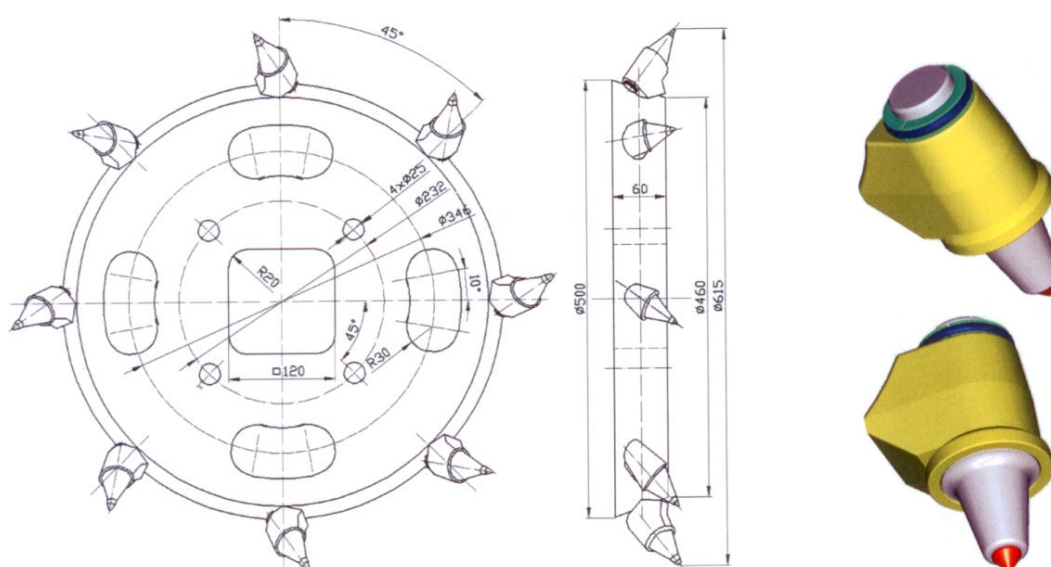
Final shape of excavation tool for hard rock disintegration process
